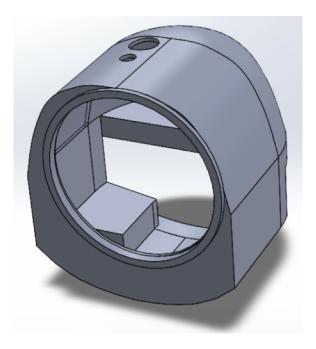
SolidWorks model of casing showing the flange lip and interfacing side with a view into the internal build of the device.
